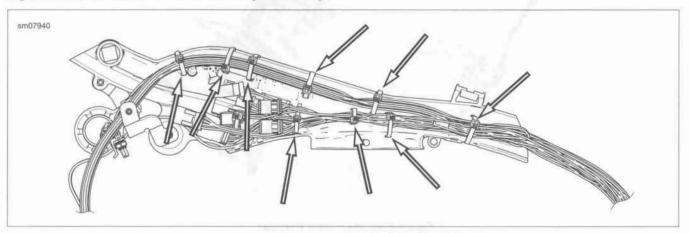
Large Backbone Electrical Caddy Cable Straps
